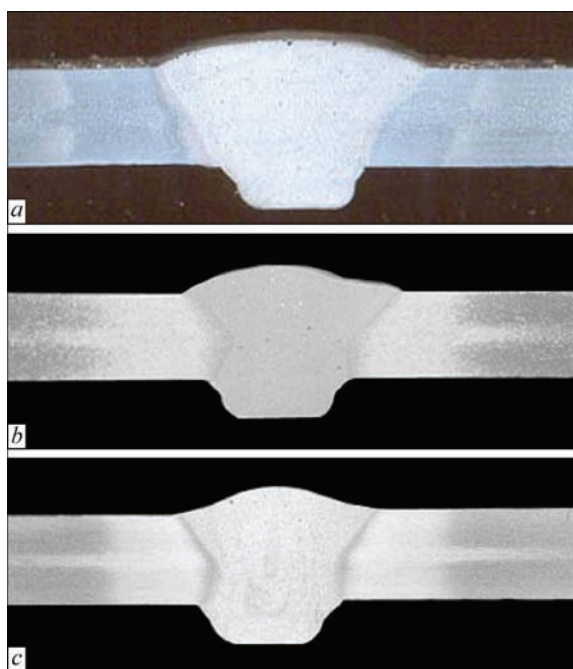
Transverse sections of welded joints of sheets from 1561 alloy ($\delta = 5.0$ mm) made by pulsed-MIG welding (a) and hybrid plasma-arc welding with electrode wire of 1.2 (b) and 1.6 mm (c) diameter
